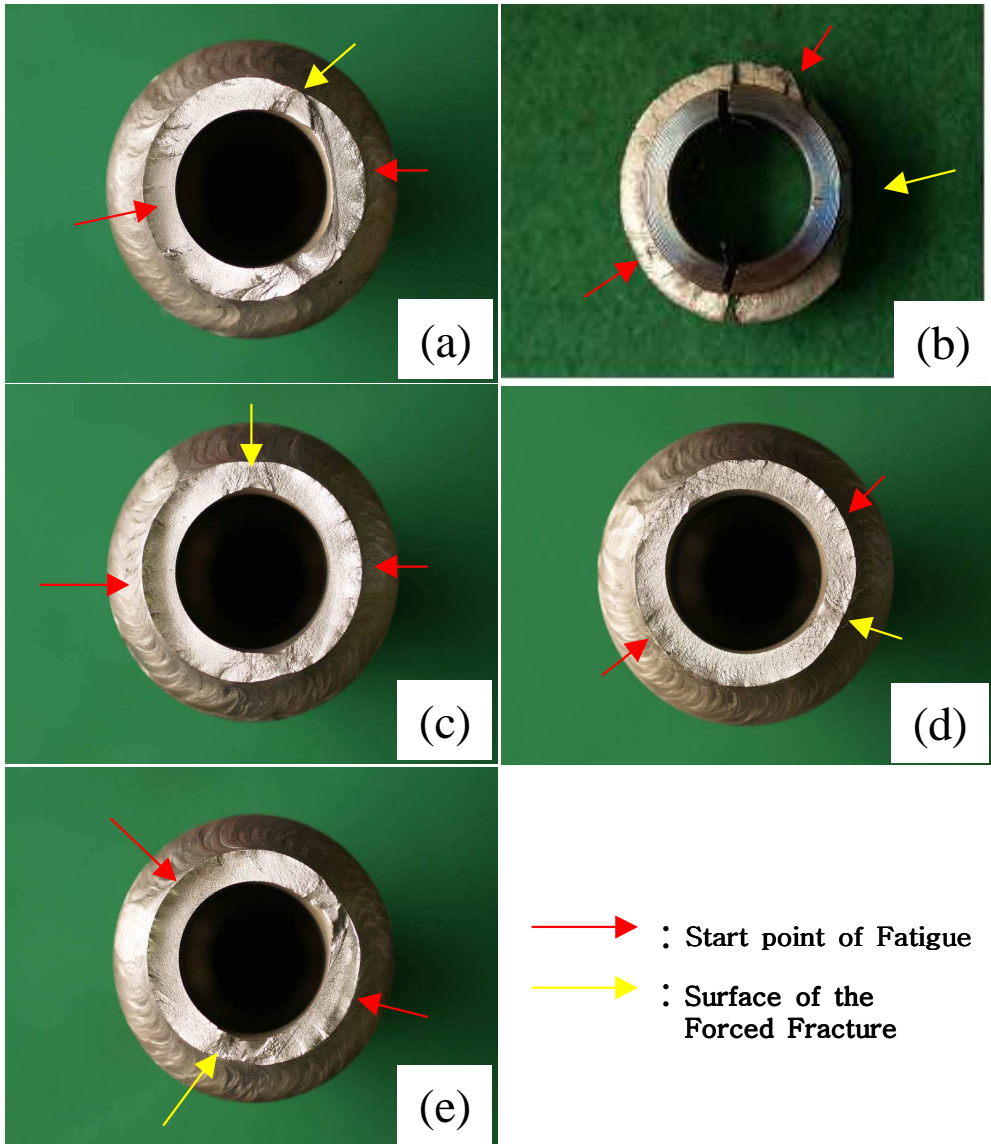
Fractographs of specimen fractured under fatigue stress amplitude of (a) 500Kg (b) 600Kg (c) 800Kg (d) 1000Kg (e) 1200Kg
